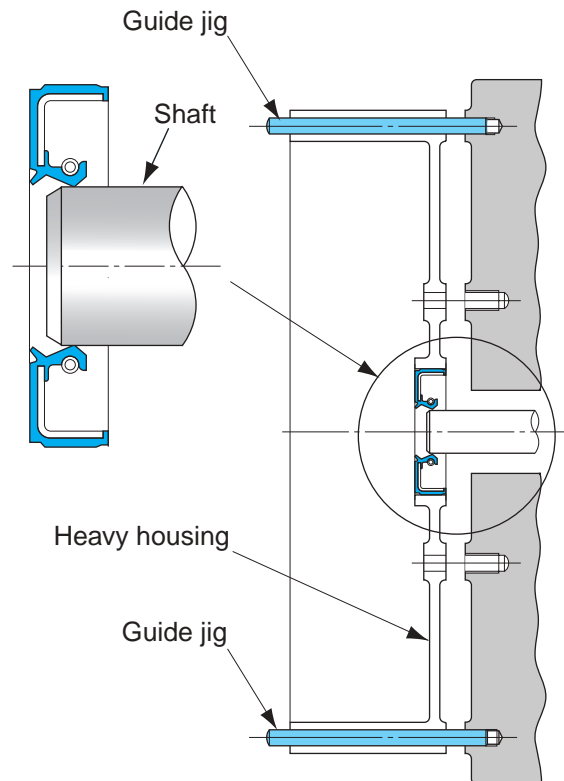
Guide jig for mounting of heavy housing with seal onto shaft
